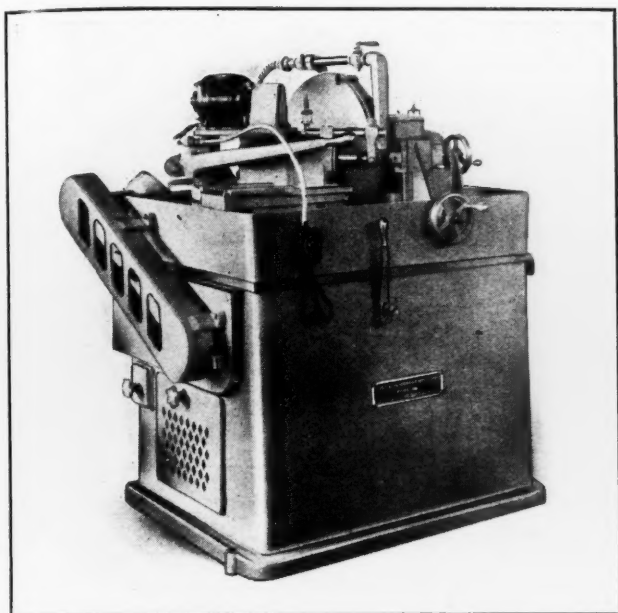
Fitchburg Improved Machine for grinding Poppet Valves
